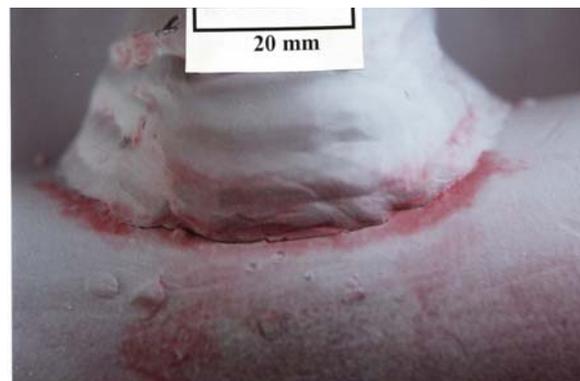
Outer surface of leaked zone after dye penetrant test showing crack at base of fillet weld where sharp transition is obvious.
